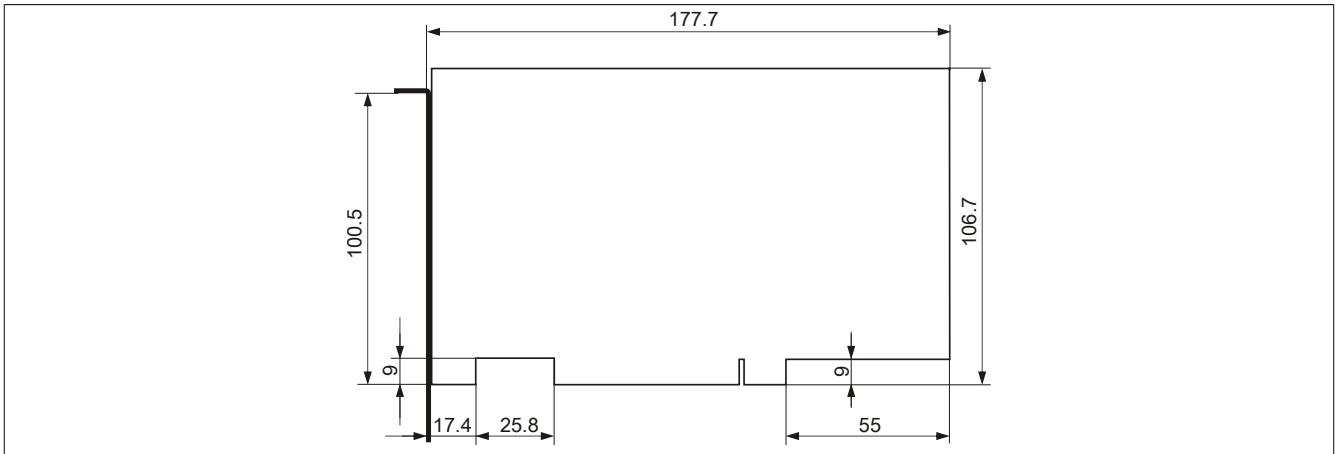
Standard half-size 32-bit PCI card - Dimensions
